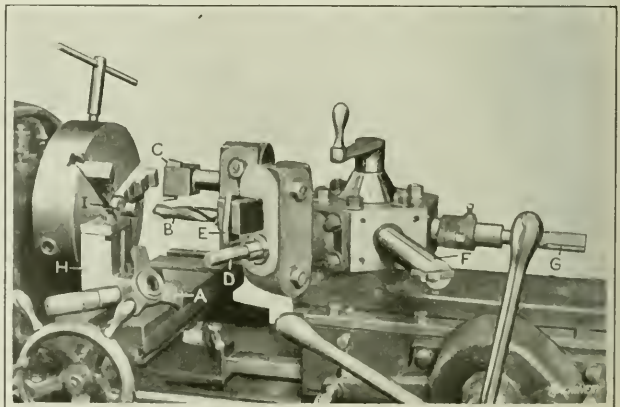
Equipment for machining Hubs of Fan Driving Pulleys
